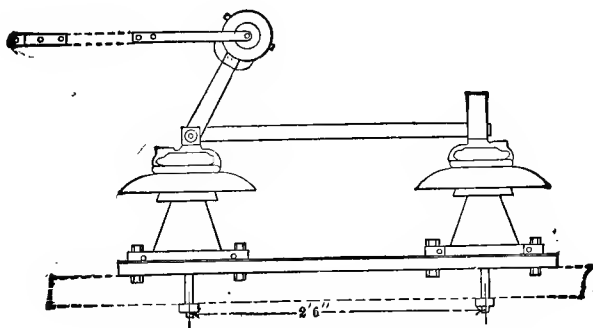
60,000-VOLT DISCONNECTING SWITCH.
